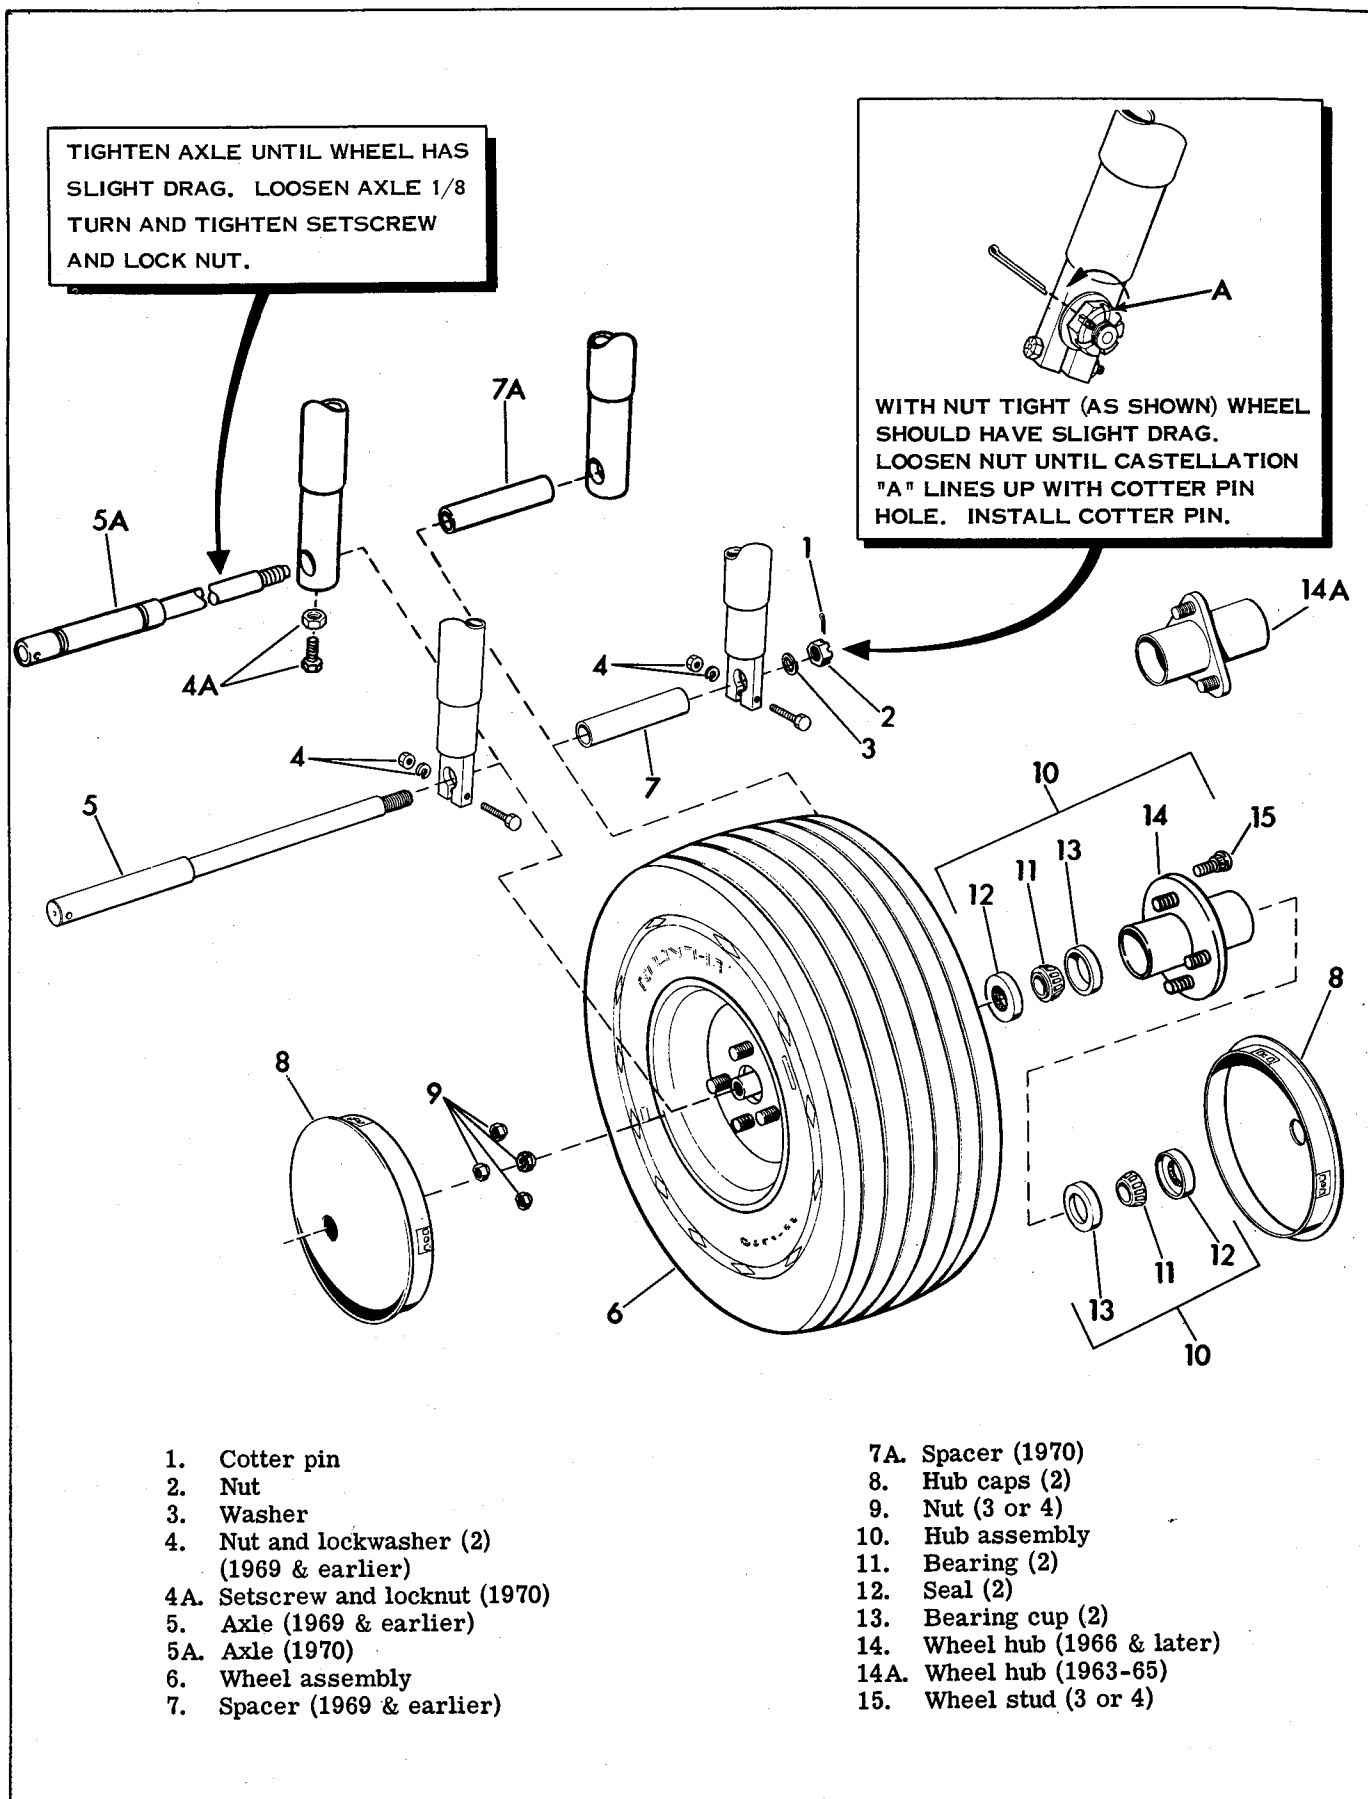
Front Wheel - 3 Wheel Car - Exploded View
